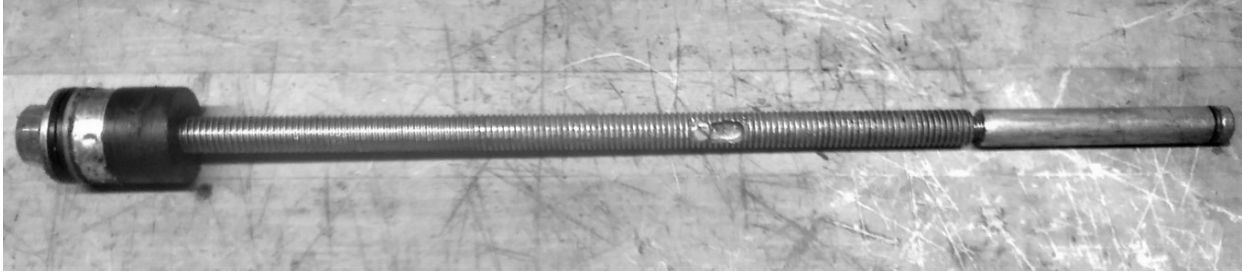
Left to right: Clamping nut, seal washers, seal support, buffer pad, retaining notch and set screw, piston extension, piston head o-ring.
